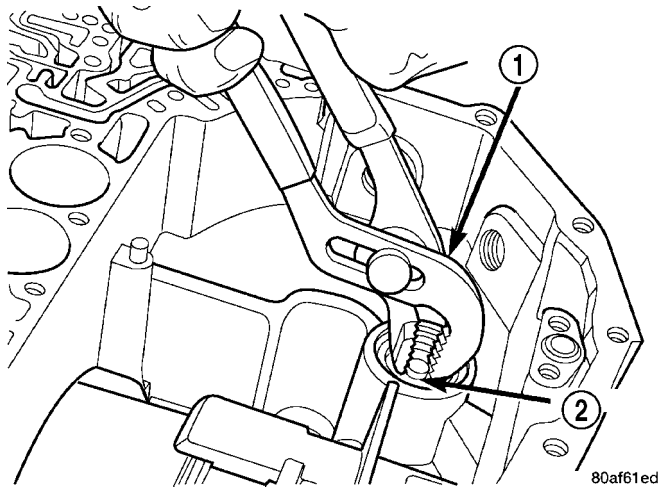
Install Low/Reverse Accumulator Plug (Cover)
